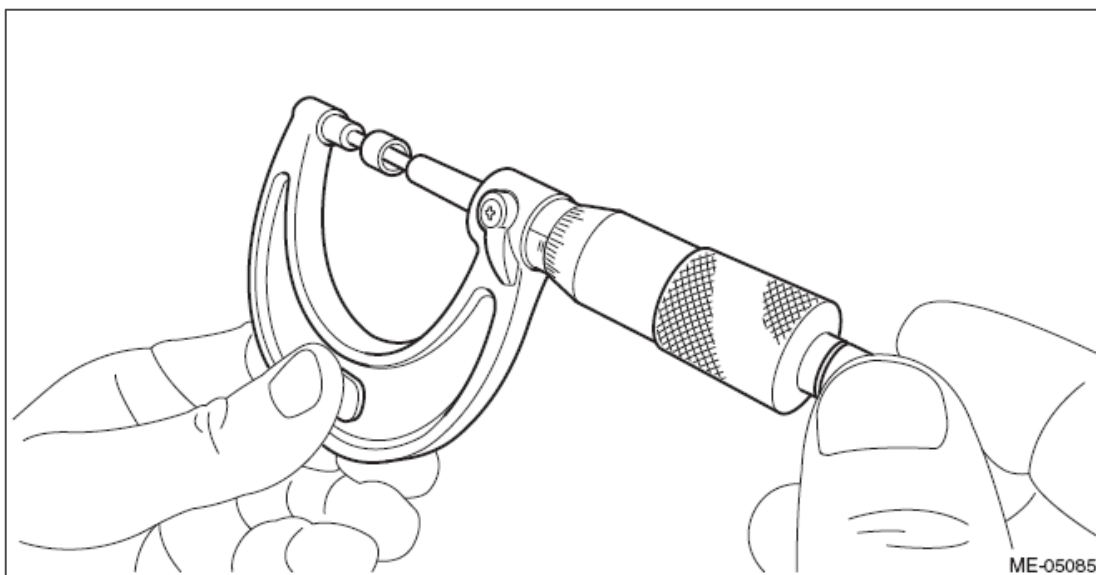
Measuring Thickness Of Valve Shim Using Micrometer
